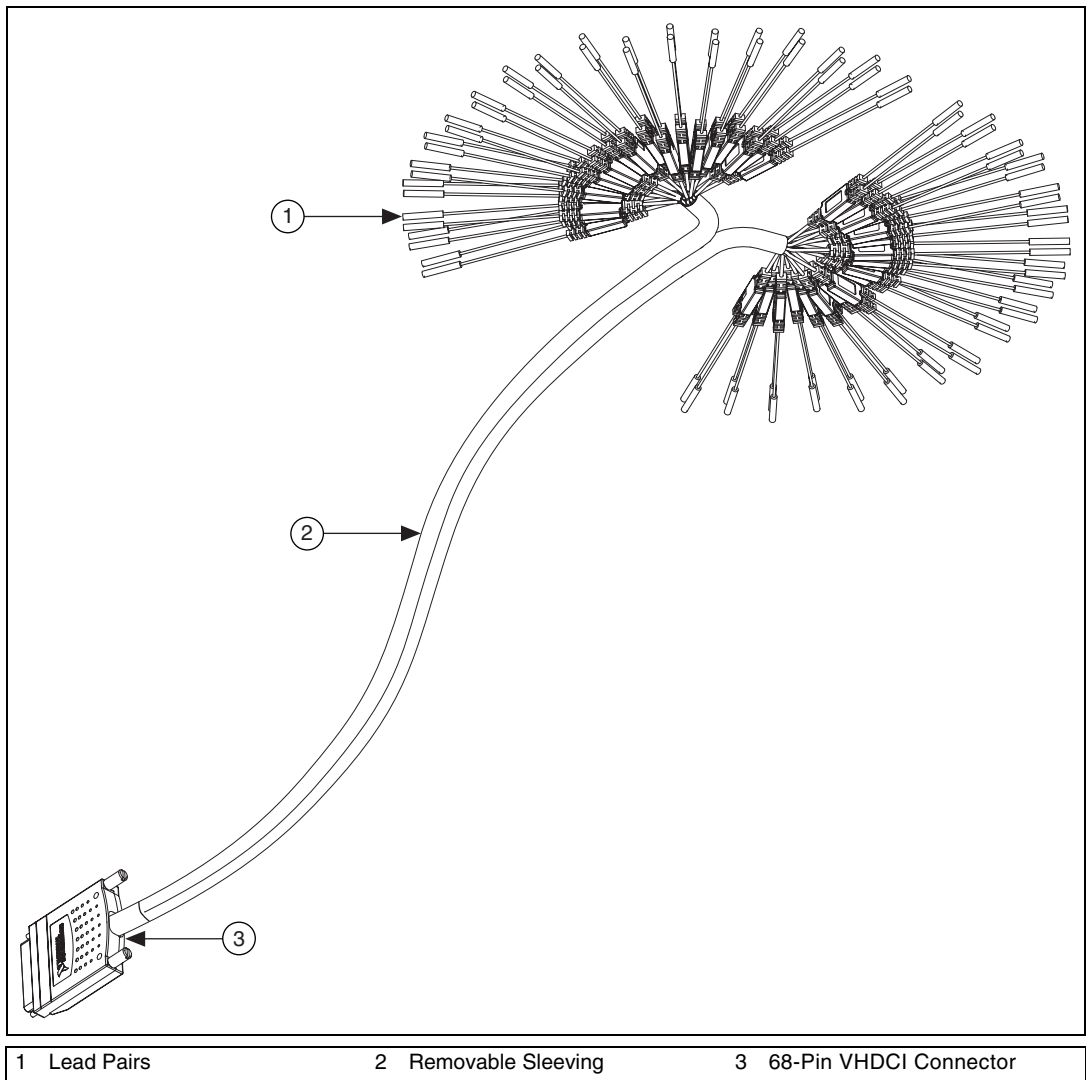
NI SHC68-H1X38 Cable Parts Locator Diagram
